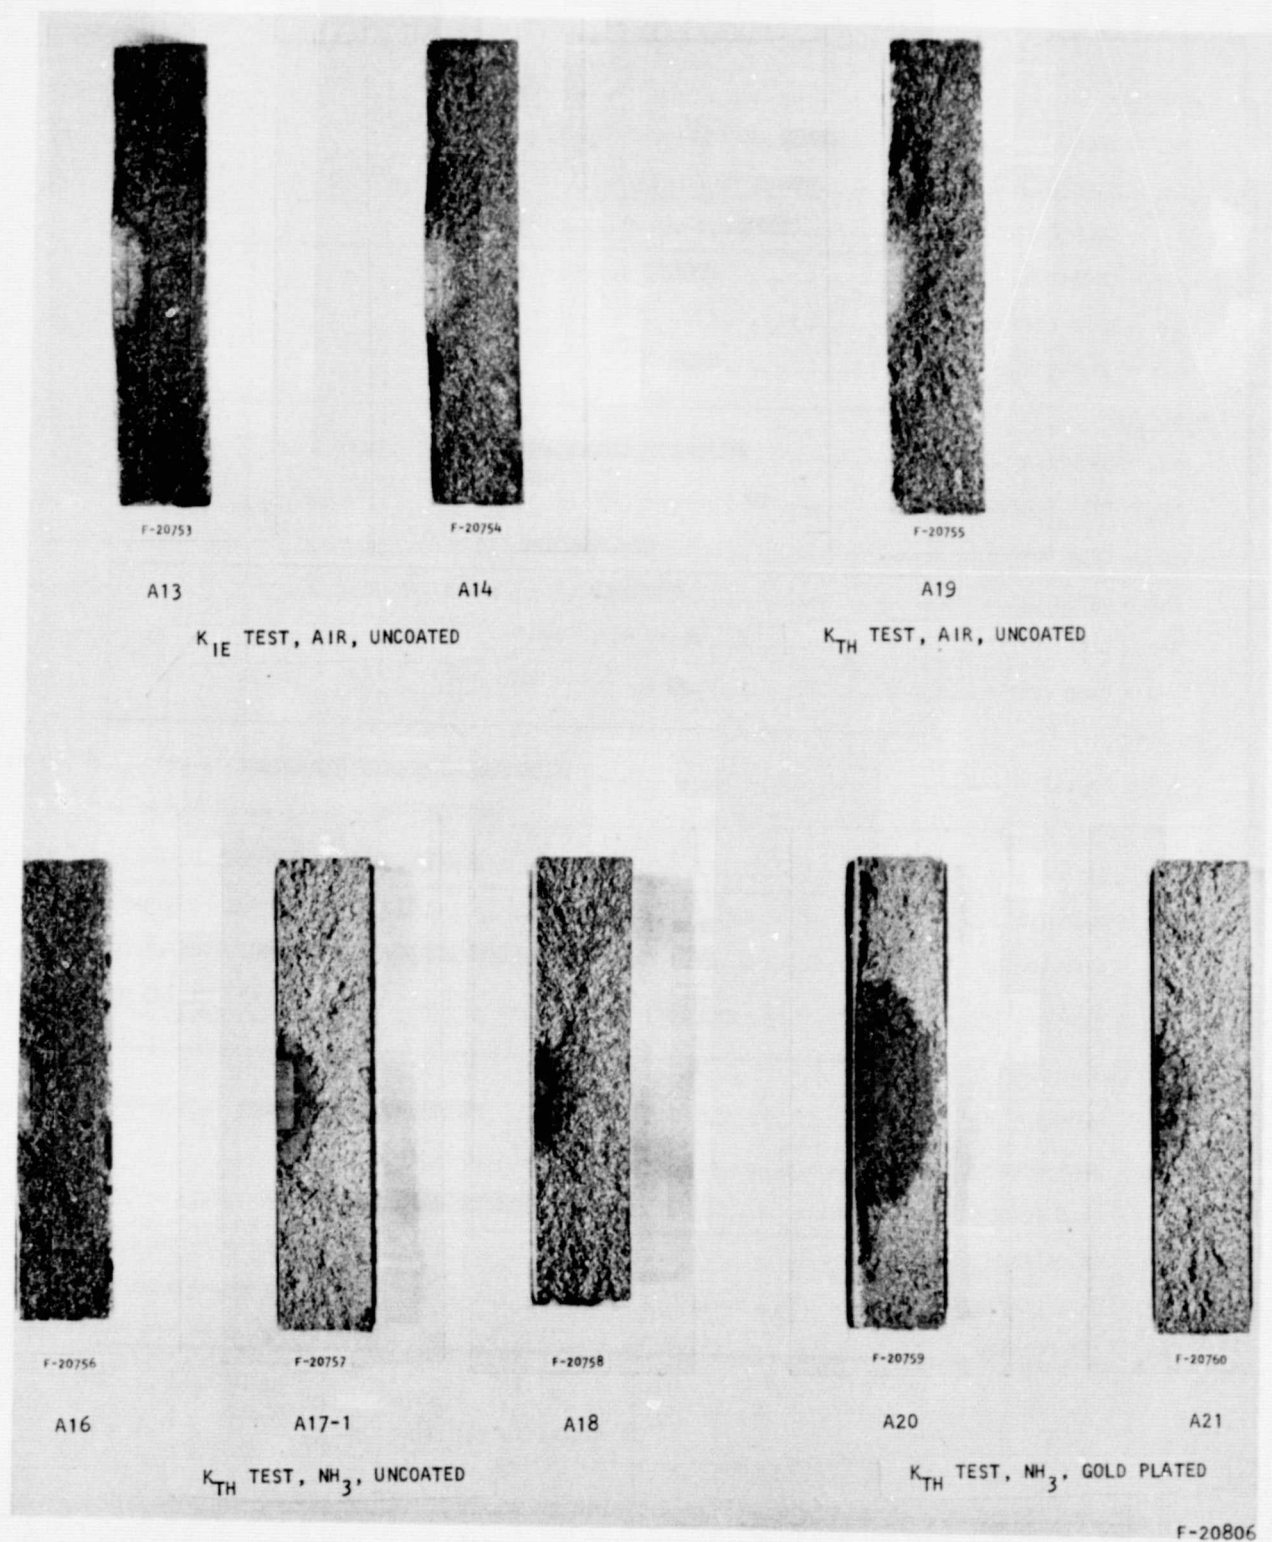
Fracture Surfaces of Astroloy  $K_{IE}$  and  $K_{TH}$  Test Specimens
